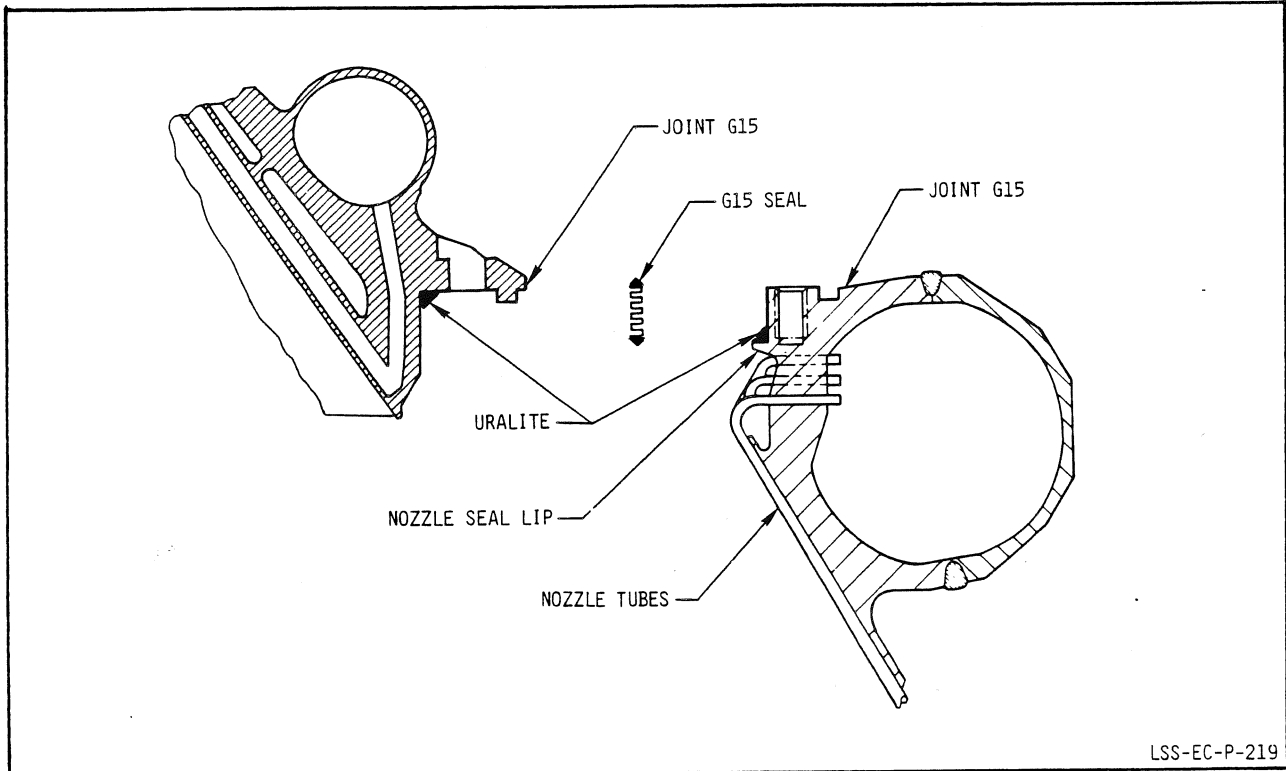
Nozzle/MCC Joint G15 Inspection
